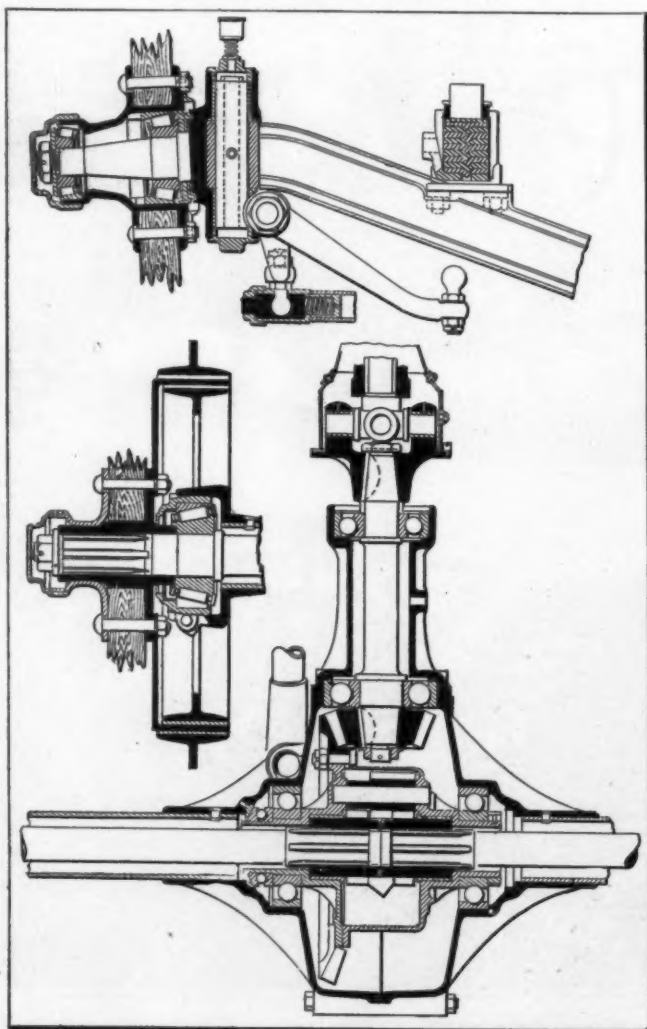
Front and rear axle of the Pierce-Arrow, showing the details of the general assembly of the differential and front knuckles
